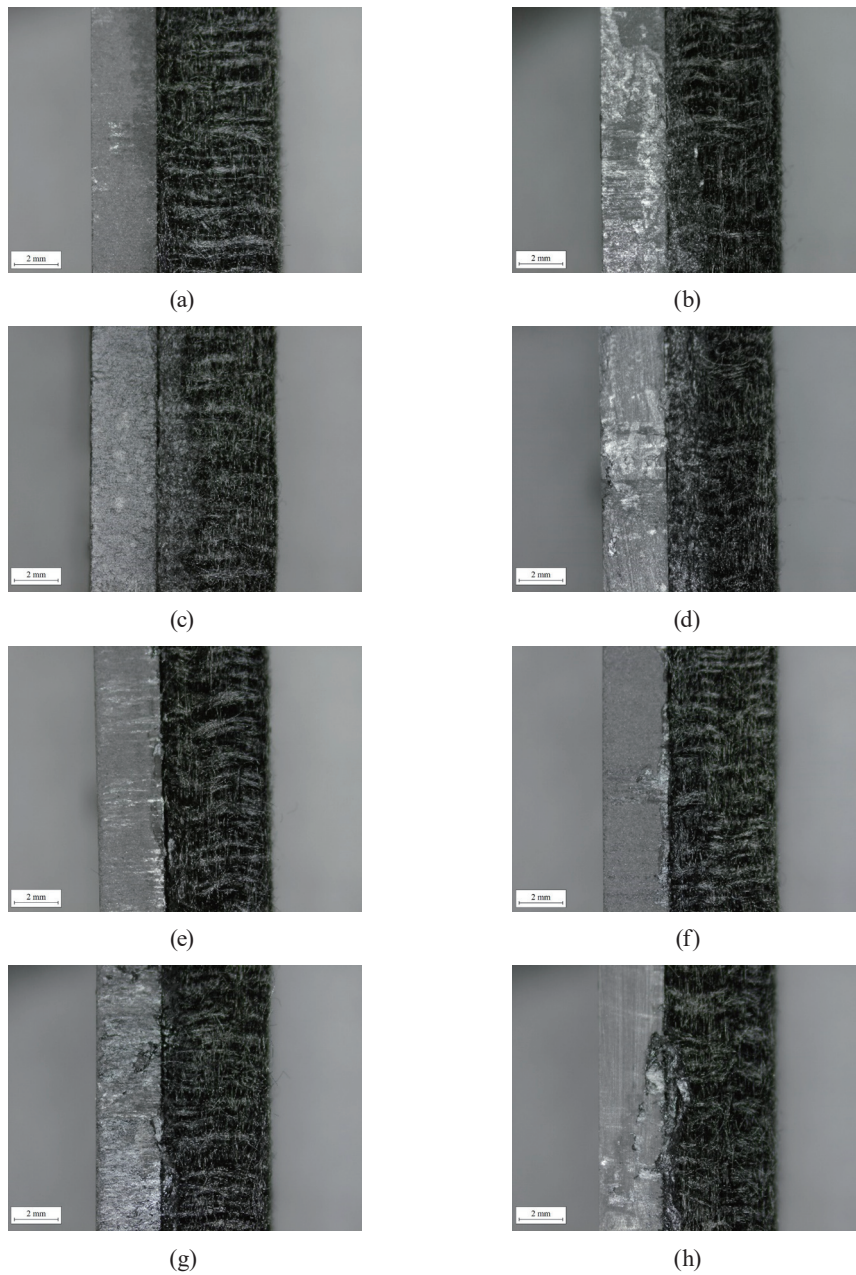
Fracture surfaces of samples (a)–(d) L1–L4 and (e)–(h) H1–H4.
